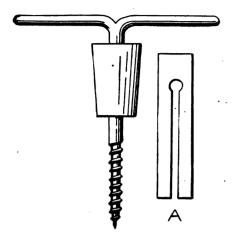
TOOL FOR REMOVING BROKEN SPOKES.
